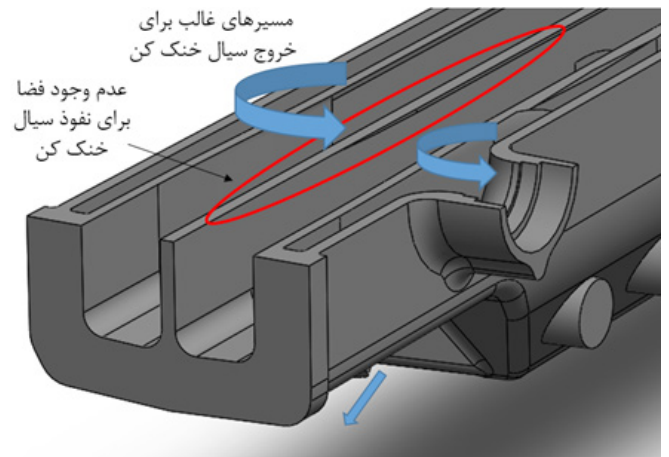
The lack of space to penetrate the coolant fluid in the cut out view of the manifold
